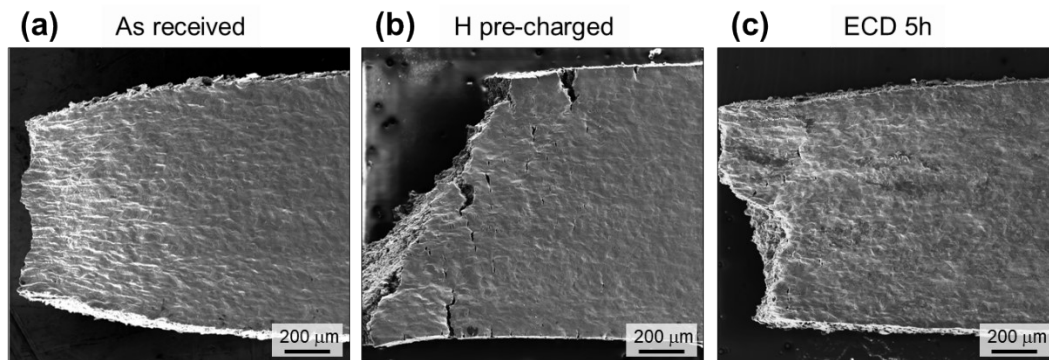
Damage analysis of fractured tensile specimens. (a) Side surface view of the as-received sample near the fracture. (b) Hydrogen pre-charged sample. (c) ECD treated for five hours.
